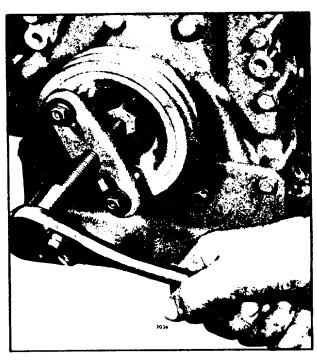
· Removing Crankshaft Pulley Using Puller J 4794-01
